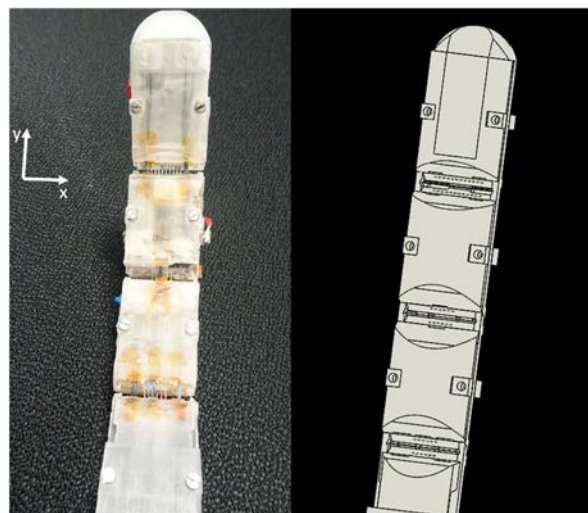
Finger prototype. Right-hand side: finger CAD drawing. Left-hand side: 3D printed prototype
